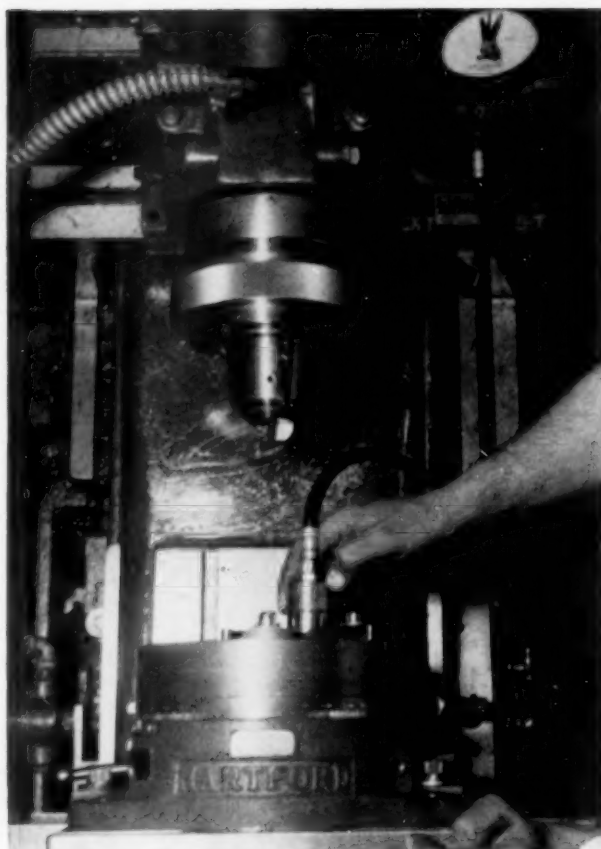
Set-up for machining studs of Planetary spiders. Operator is checking finished part with a Moore Air Gage.
